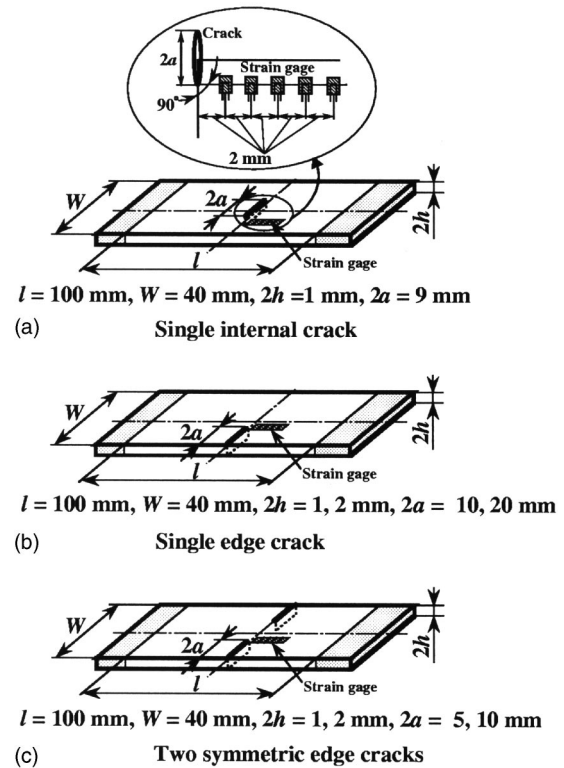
Geometry and dimensions for the (a) single-internal crack, (b) single-edge crack, and (c) two symmetric-edge crack specimen.
